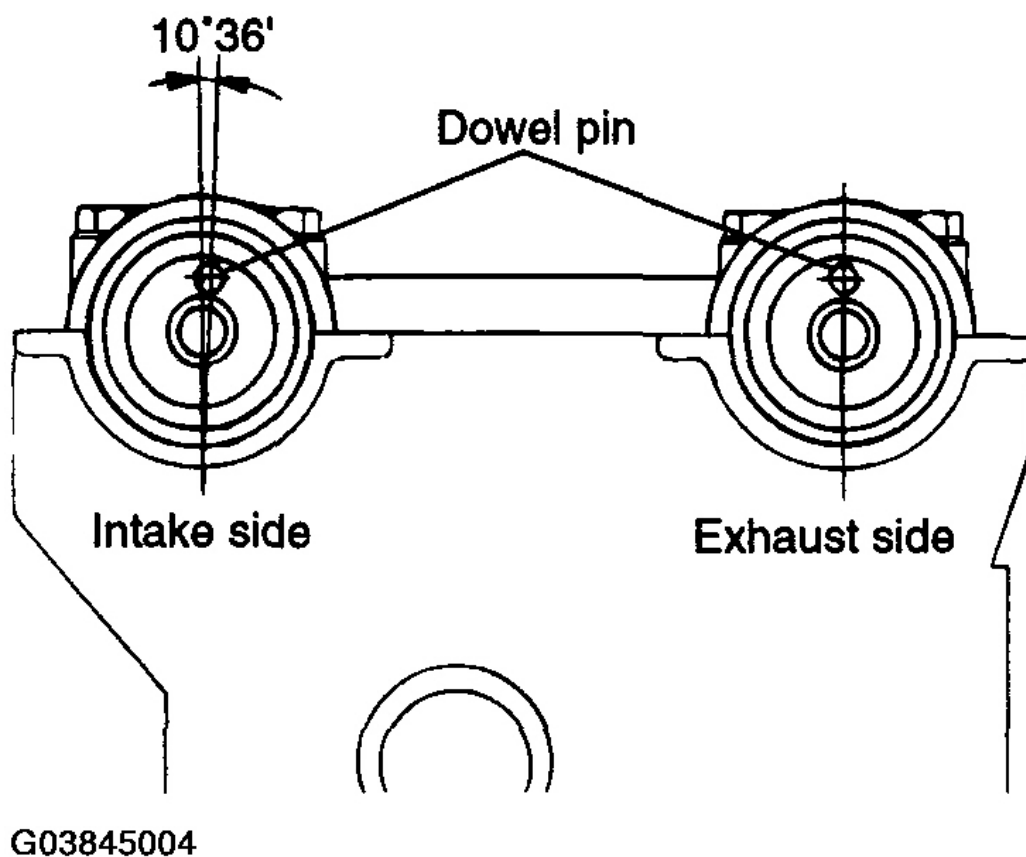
Identifying Location Of Camshaft Sprocket Dowel Pins
